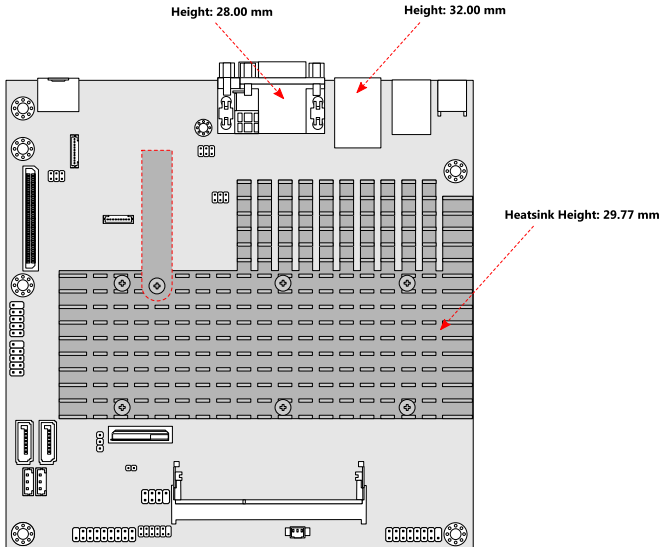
Dimensions of the VB8004 with VB8004-A daughter board I/O
